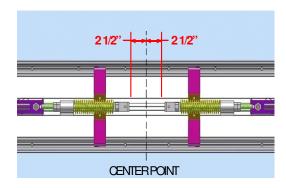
d. Bi-Part Closed Limit (Bottom View)
